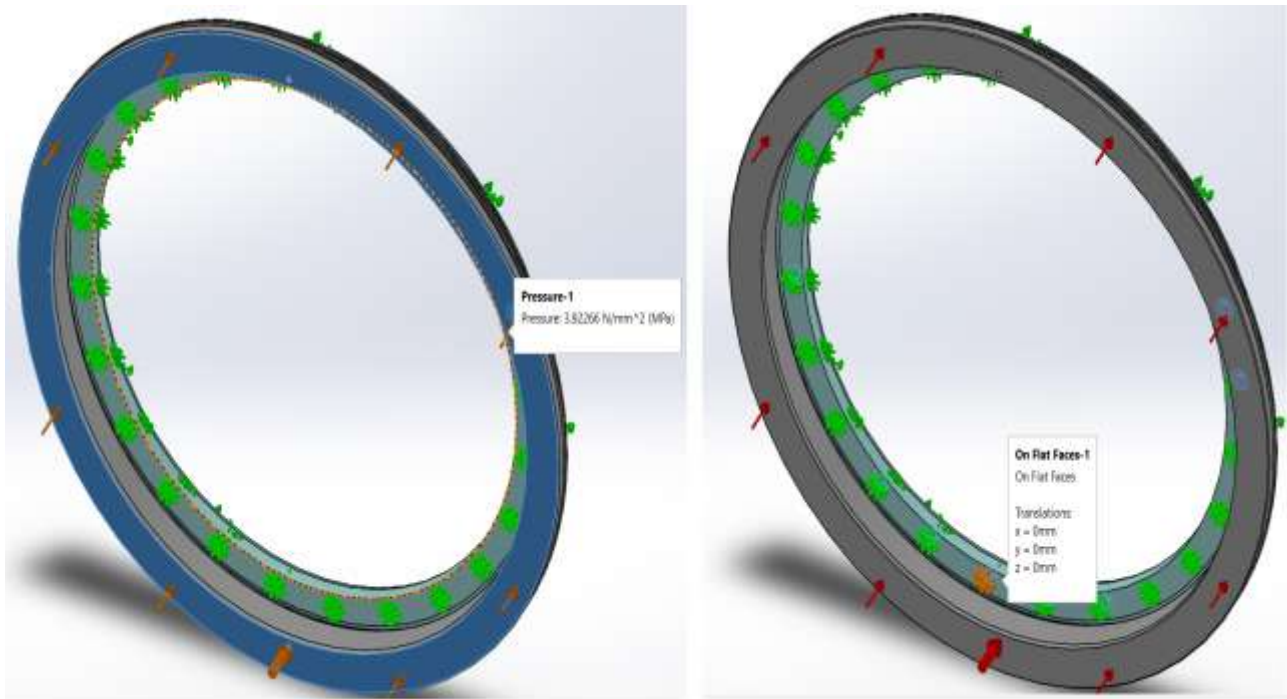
Axial load and fixture locations on the spherical valve sealing system
